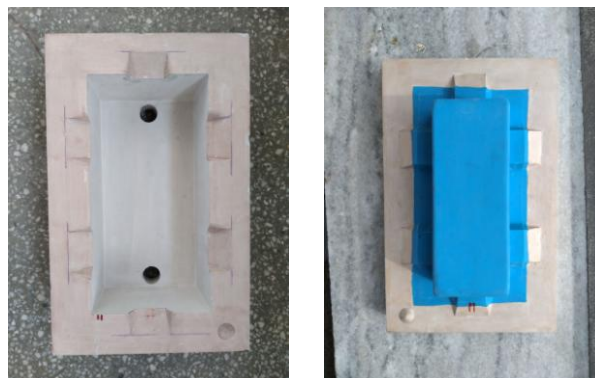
Two-part gypsum mould with silicone insert. The first part, together with the sprues, forms the outer shape of the moulded article, while the silicone insert forms the inside.
